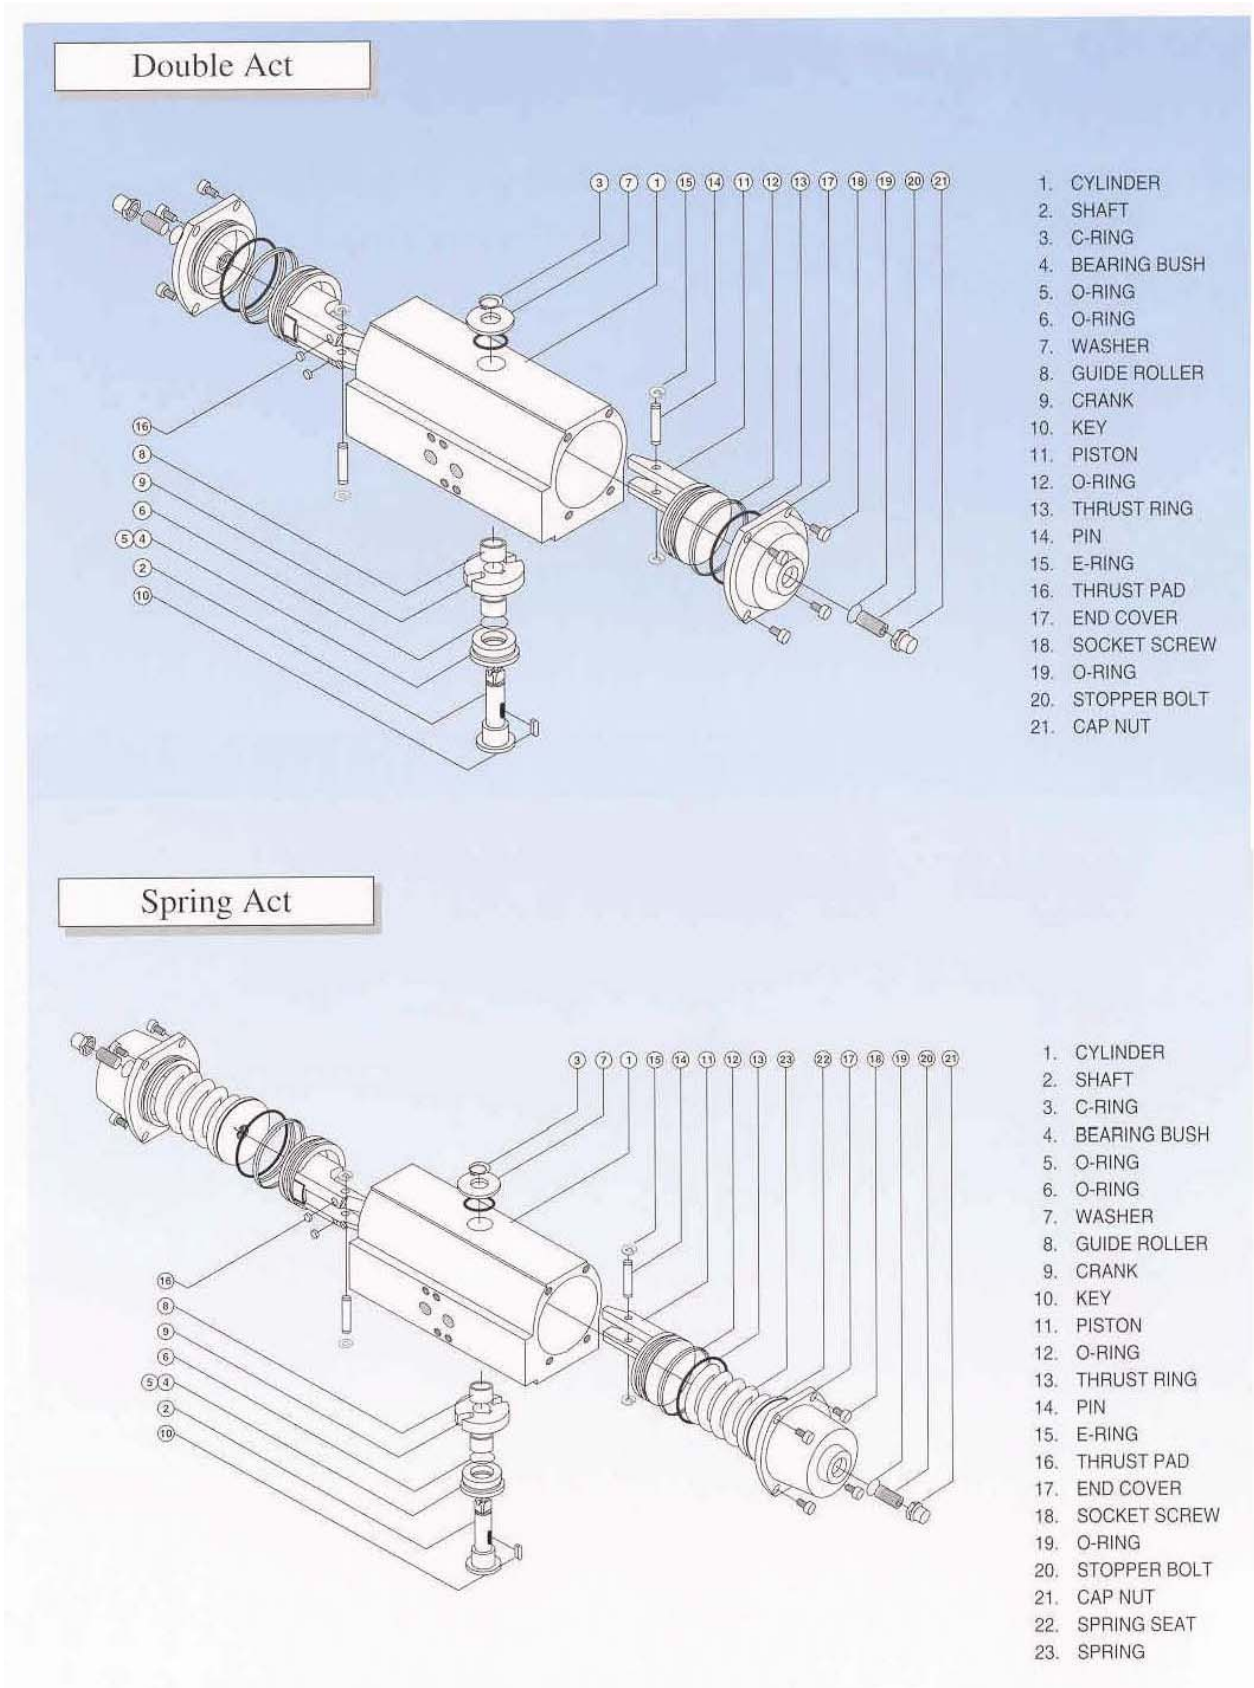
Actuator Assembly Diagram (Scotch yoke type)
